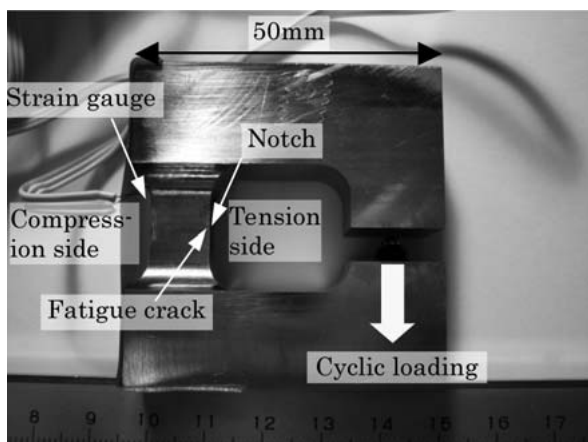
G-type specimen configuration and loading direction for fatigue test.
